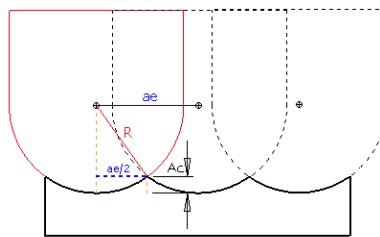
Cusp high in a planar surface and contact tool-surface in free form milling
